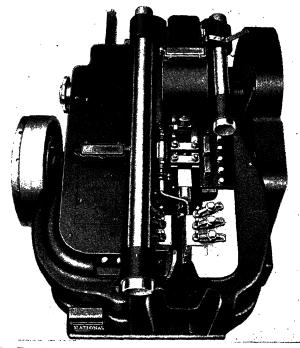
Top view of a high-duty forging machine. The left die block moves to the right and assists the right block in holding the work. (National Machinery Co.)
